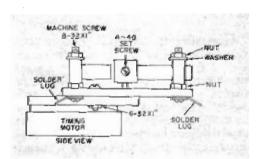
Stationary contacts (side view) should be positioned to provide gentle contact and timed to extinguish the light just before the ring reaches it.
